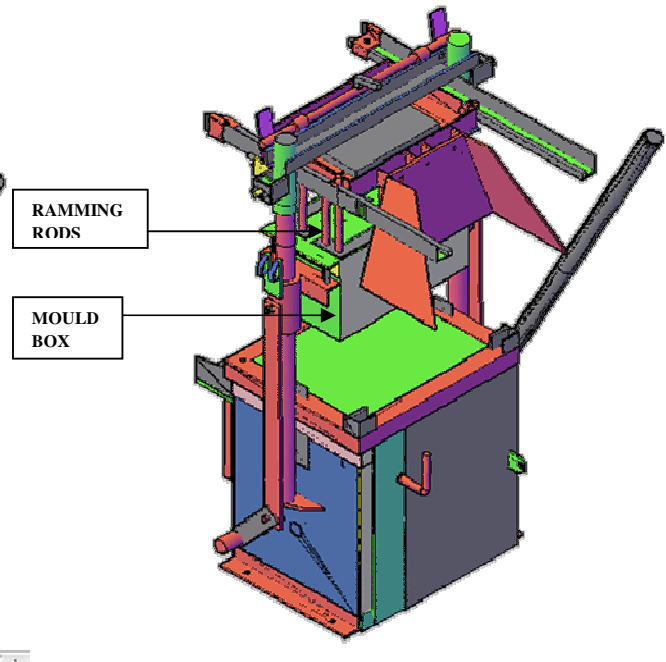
9" Double Mould Vibration Compactor Block Moulding Machine
